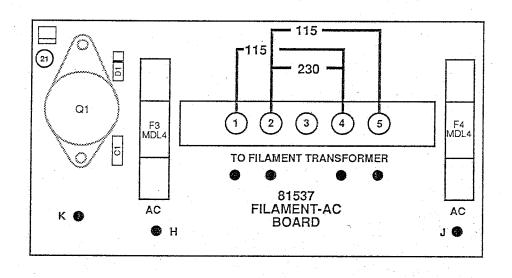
81537 FILAMENT-AC BOARD COMPONENT LAYOUT
